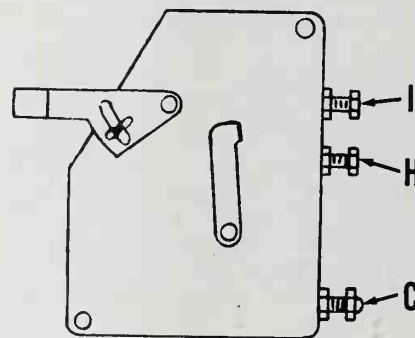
View of speed adjusting screws: (I) Low idle speed; (H) High idle speed; (C) Torque control. Refer to text for adjustment.
